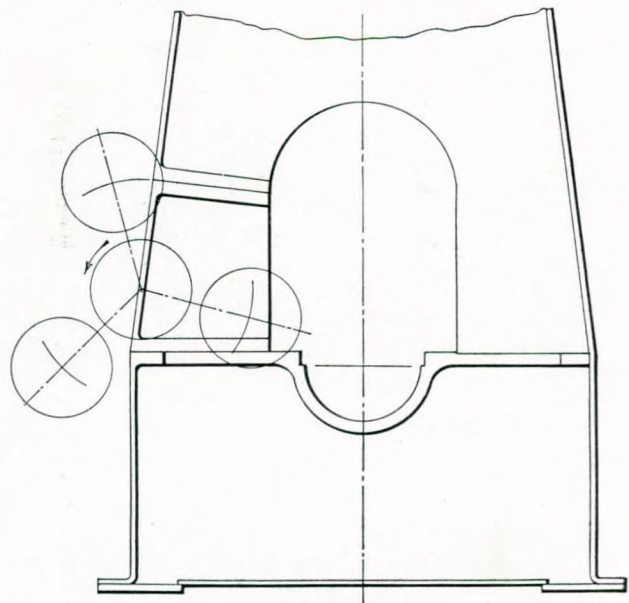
Line drawing illustrating removal of crankshaft from front of engine.
